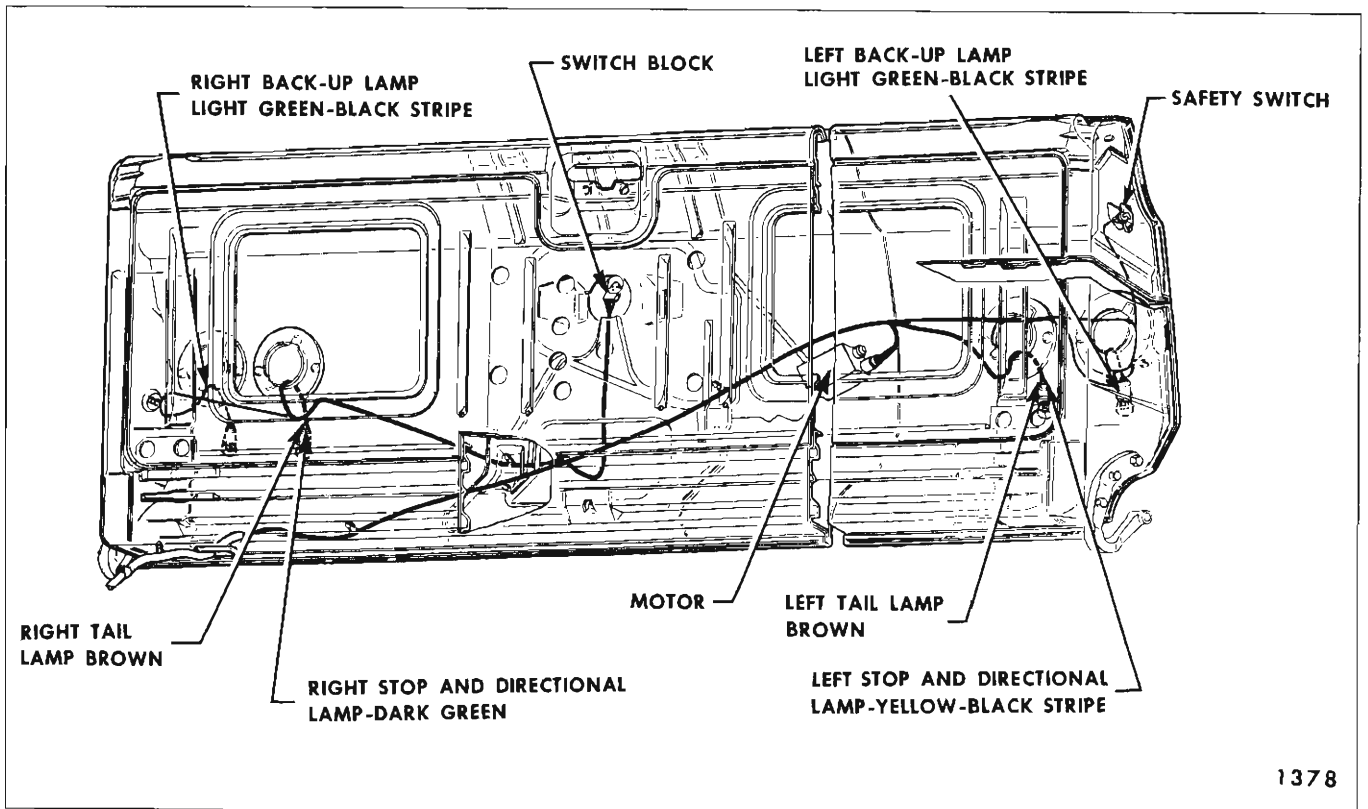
L27—Tail Gate Wiring - 15-16000 (16000 Shown)
